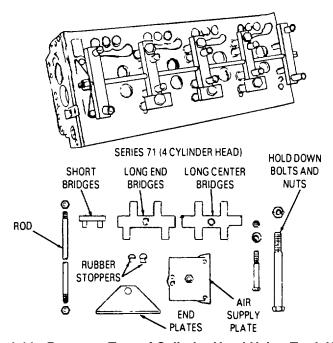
Pressure Test of Cylinder Head Using Tool J28454.
